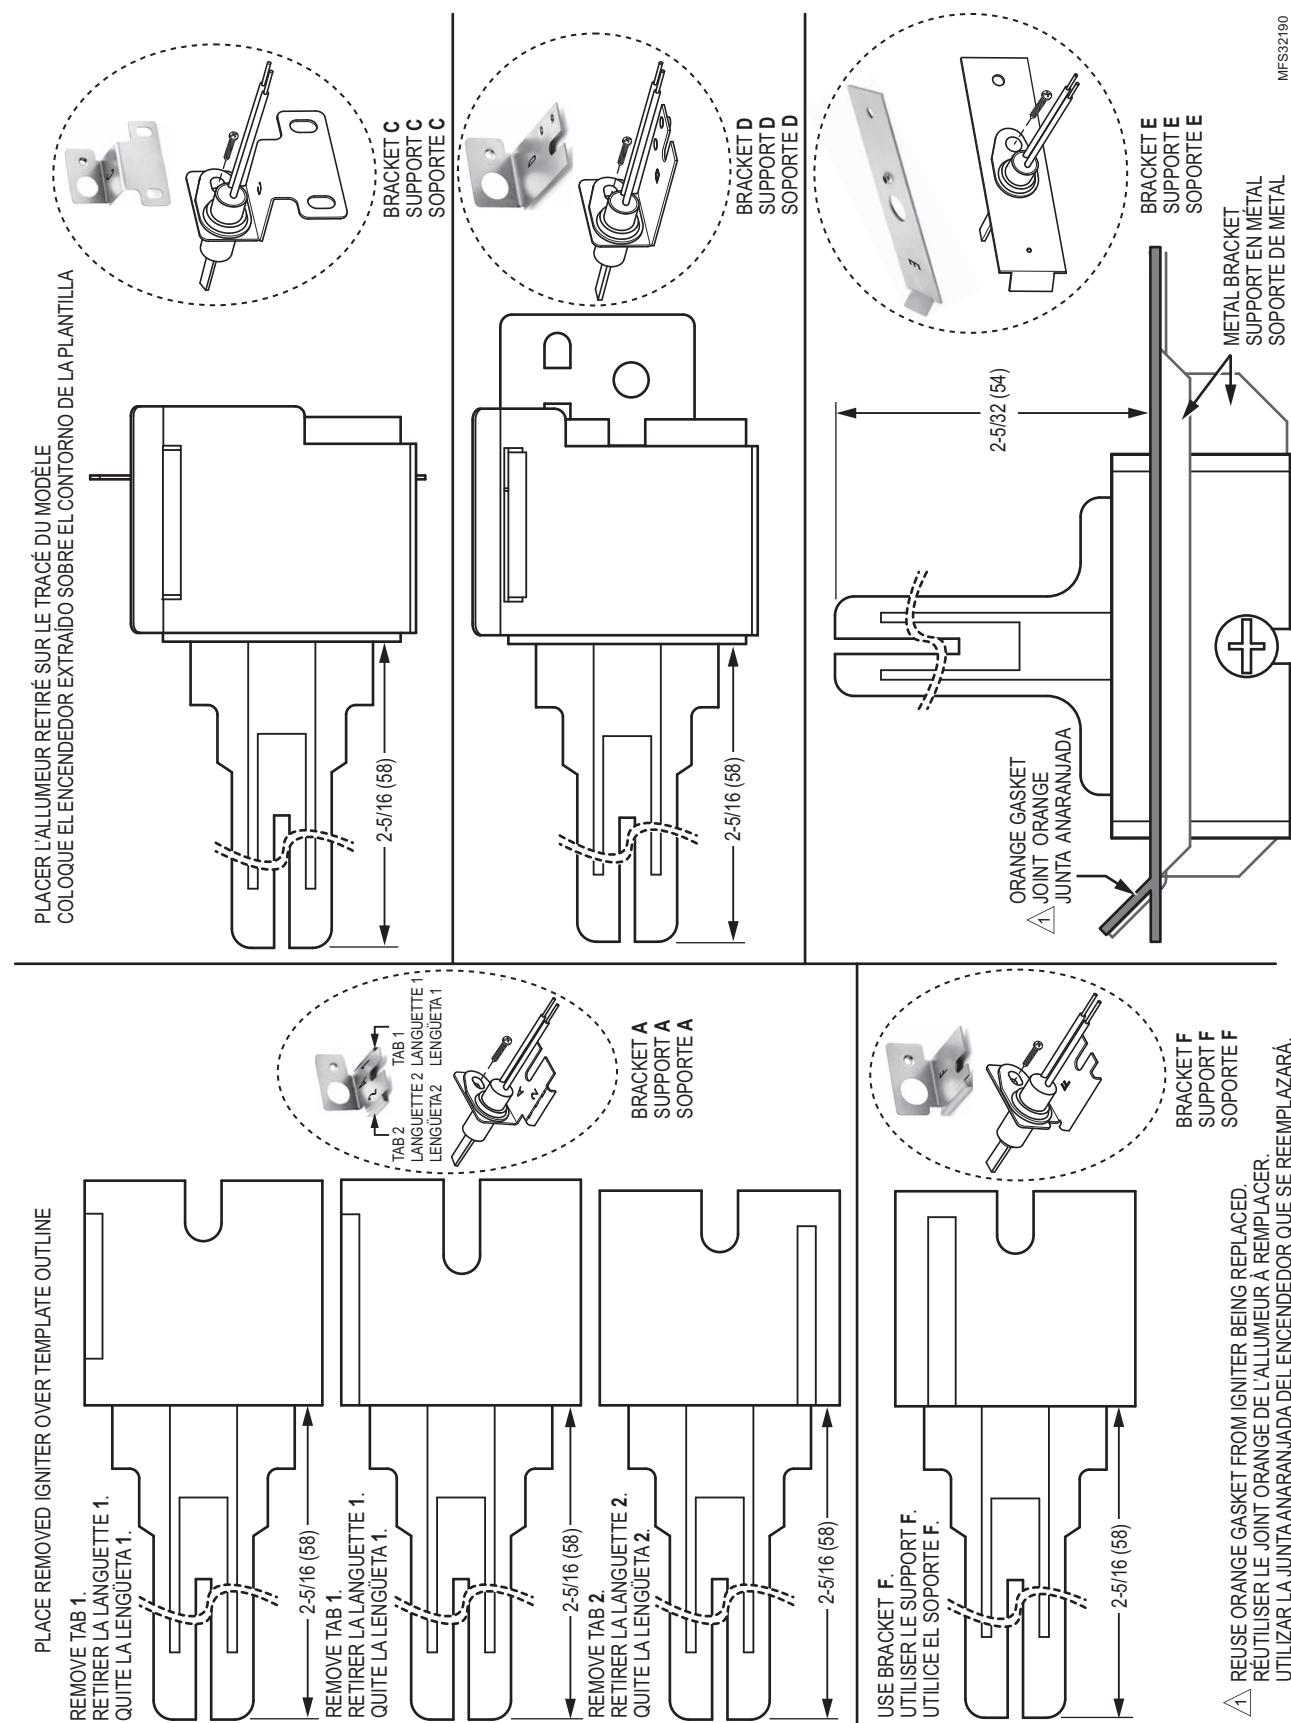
Igniter brackets A, C, D, E, and F template; dimensions in in. (mm).
